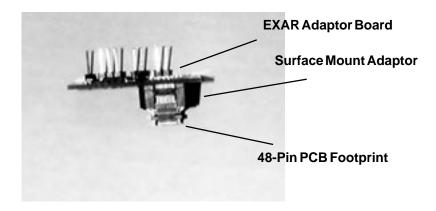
Side View, Surface Mount Adaptor Plugged Into the Exar Adaptor Board
